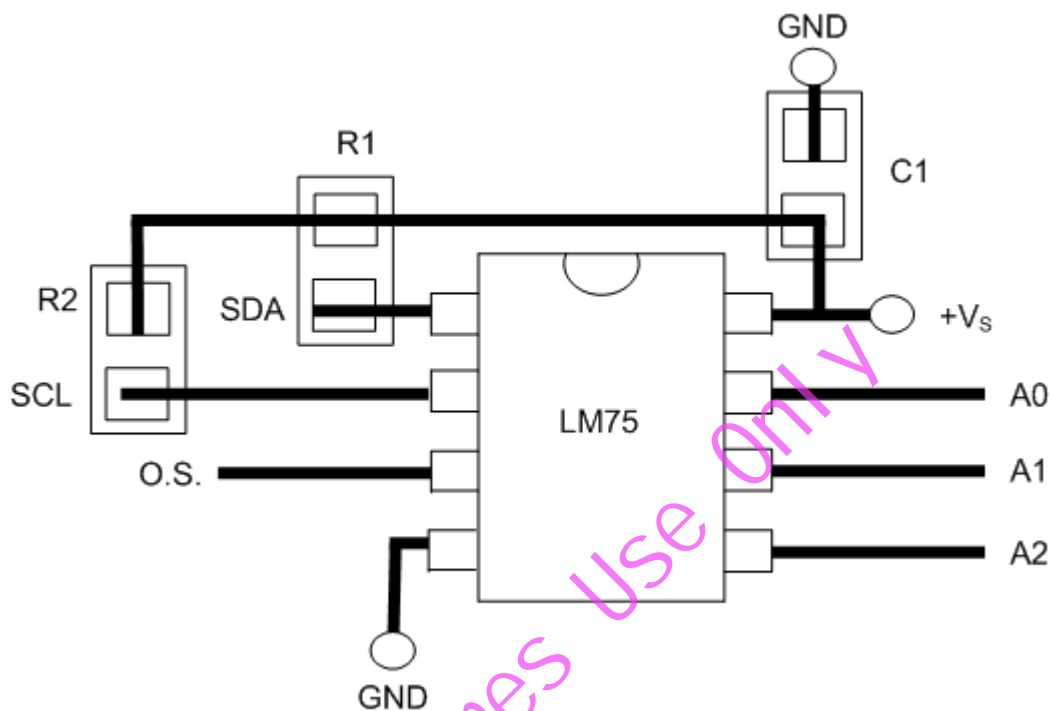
Printed Circuit Board Used for Thermal Resistance Specifications
